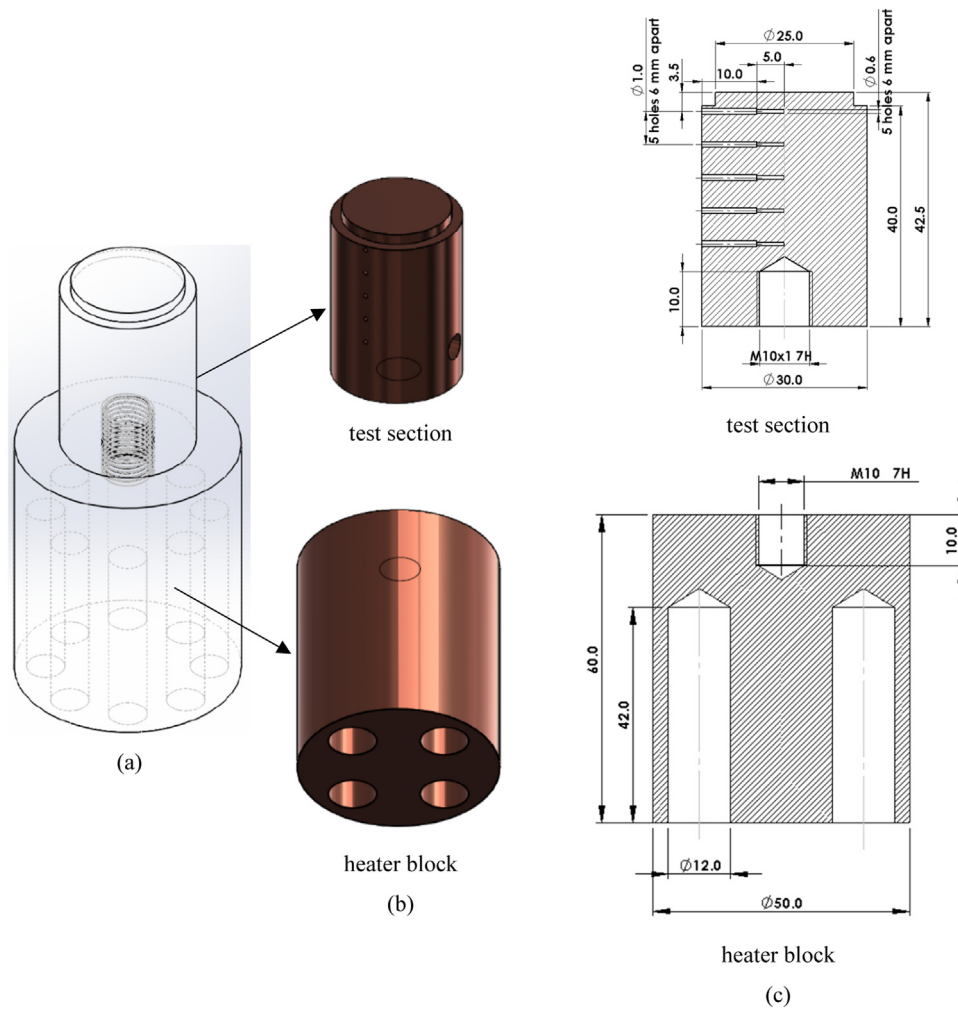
(a) CAD drawing of the copper test section and the heater block connected with M10 copper threaded connector, (b) CAD drawing for test section (top) and copper heater block (bottom), and (c) 2D drawing of the test section (top) and heater block, [9]. (Dimensions are in mm).
